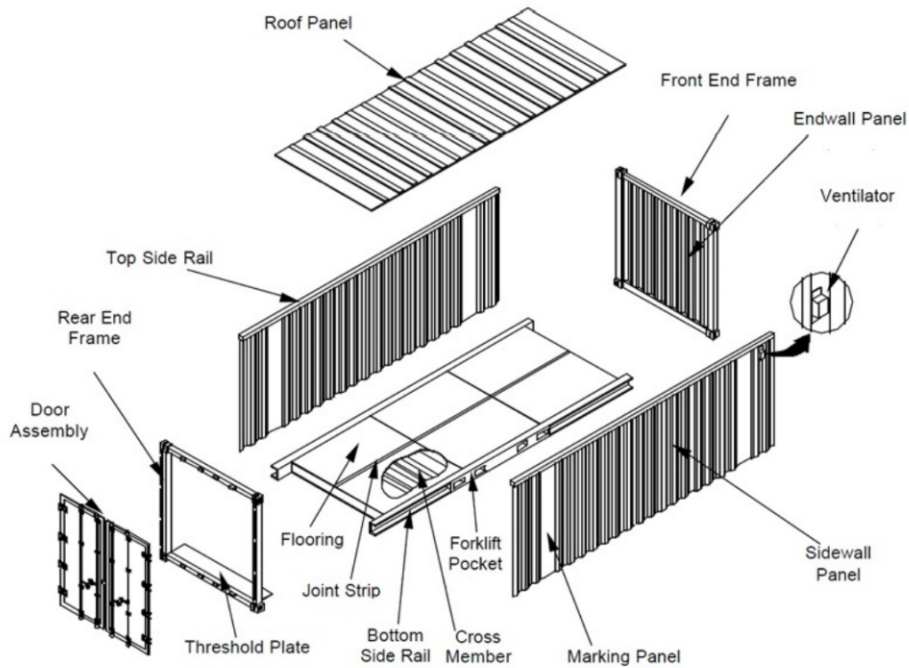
Exploded schematic view of a shipping container (RSC 2019)
